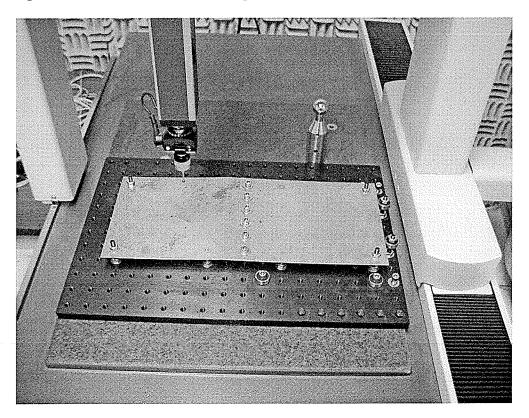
Measuring the assembly variation after releasing the fixtures
